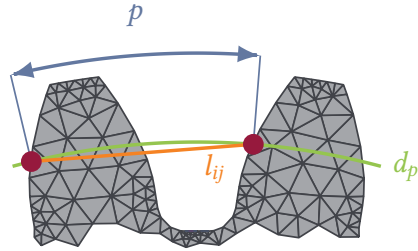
The Pitch Measurement for Skin Model Shapes of Gears
